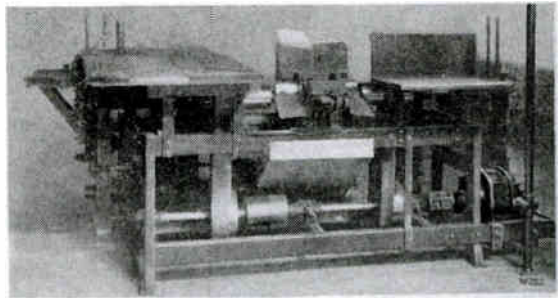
7 1/2 H.P. Induction Motor Direct Connected to Driving Shaft of Frame Machine, and Belt Connected to a Four-Spindle Dowel Boring Machine
